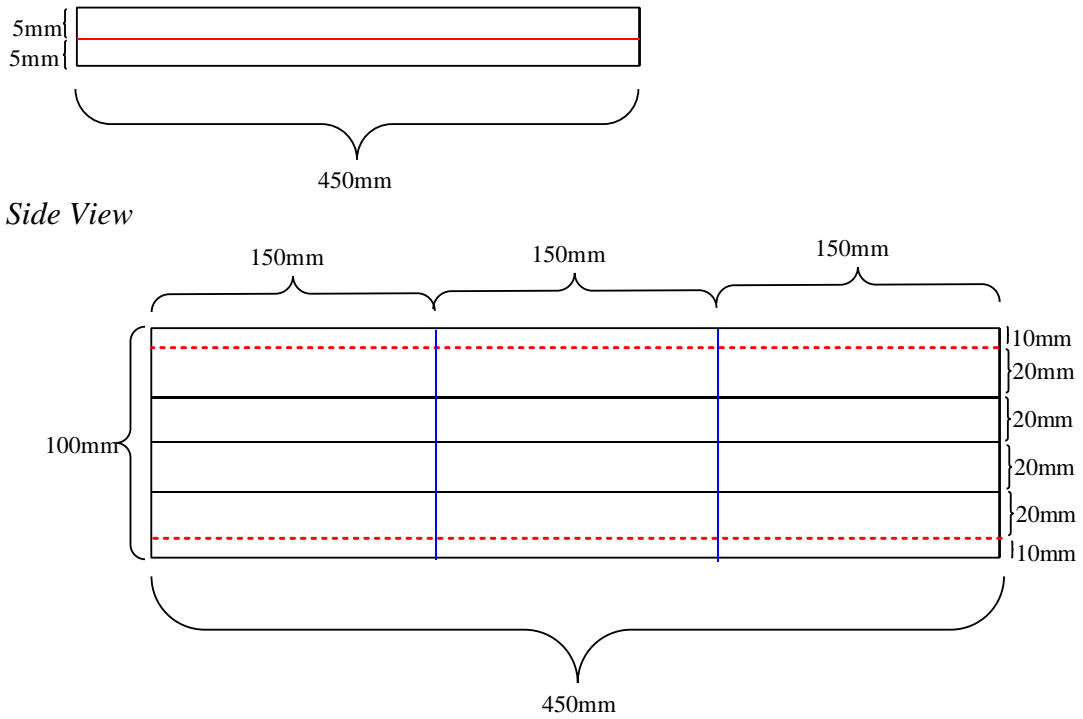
The test panels showing the divisions to give 12 test pieces per panel.
